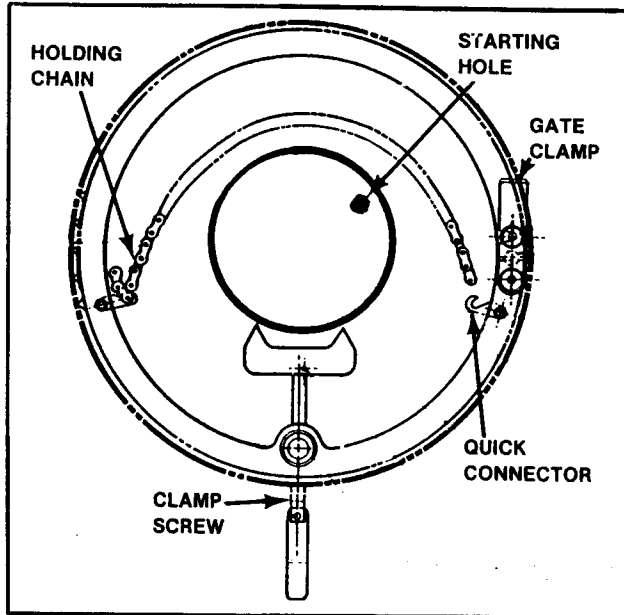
SPROCKET WORK HOLDING FIXTURE.
